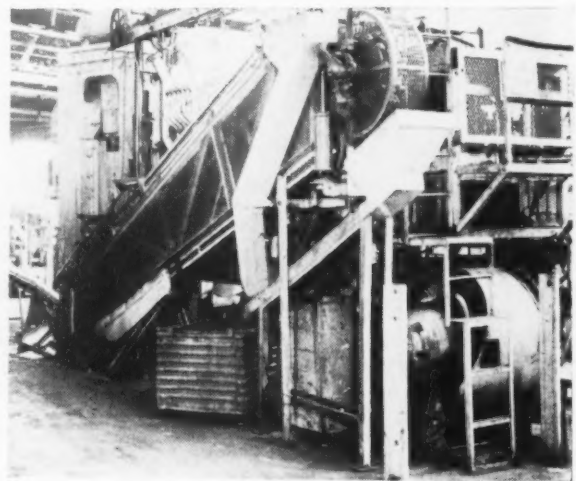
Cold billets for this barrel-type gas-fired furnace are placed on the gravity conveyer at the lower left and delivered to the power conveyer on the left side of the furnace. Billets go through the furnace on water-cooled rails.
